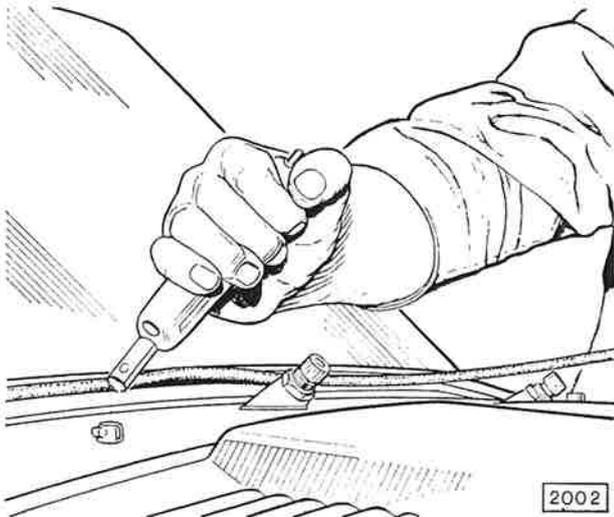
Using the special tool ("B") Fig. 16, for inserting the rubber sealing strip in the windscreen sealing rubber
